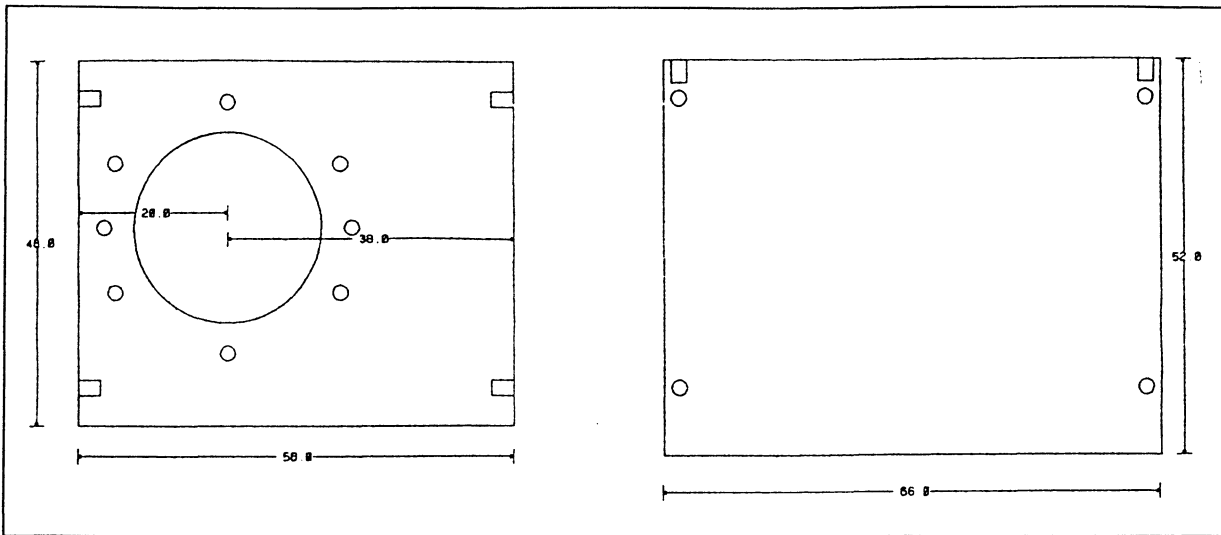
Drawing of C and D side, see Figure 10-1.
